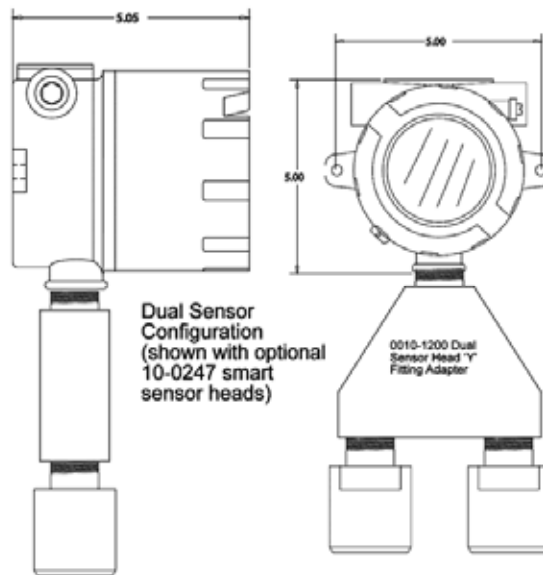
BFT-44 Explosion-Proof Housing with Dual Sensor Head Adaptor
